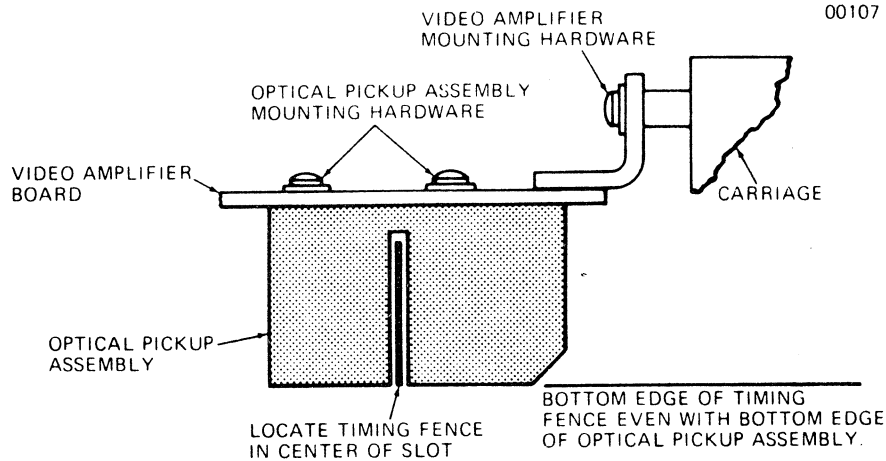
OPTICAL PICKUP ASSEMBLY ADJUSTMENT
